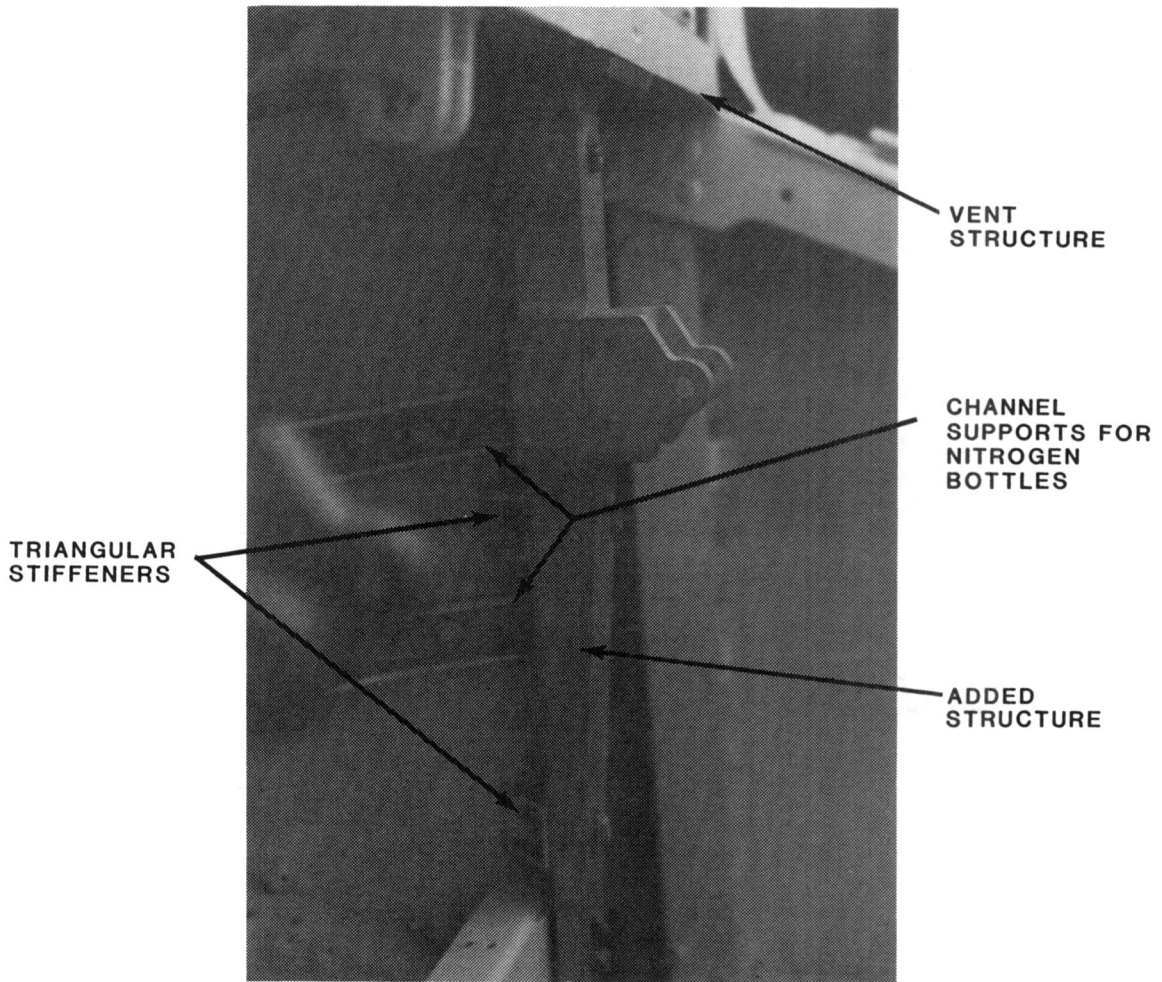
Upper bearing attachment on pilot outboard side during crew module tests.
